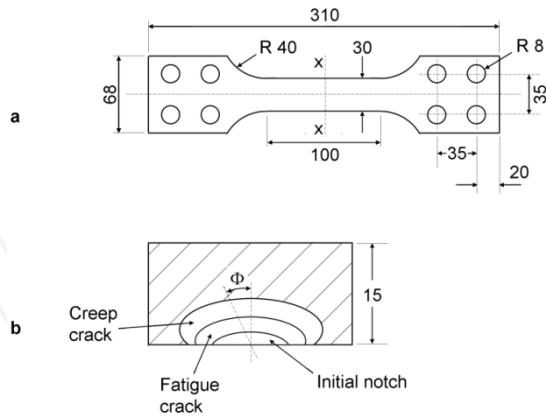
Thumbnail crack specimen (a) geometry, and (b) crack profile (dimensions in mm).
